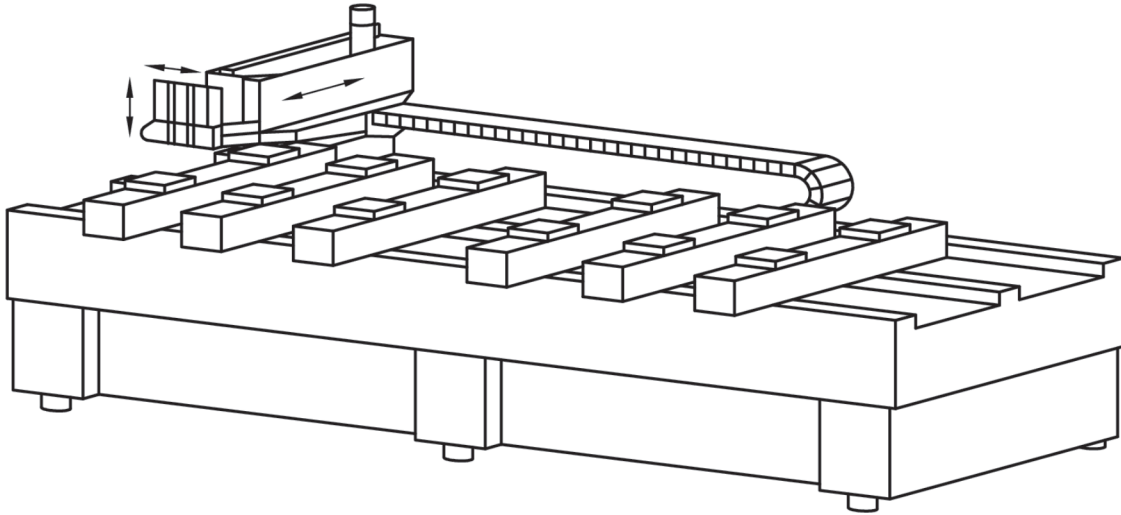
Example of a C frame machine with fixed table and moving machining head
